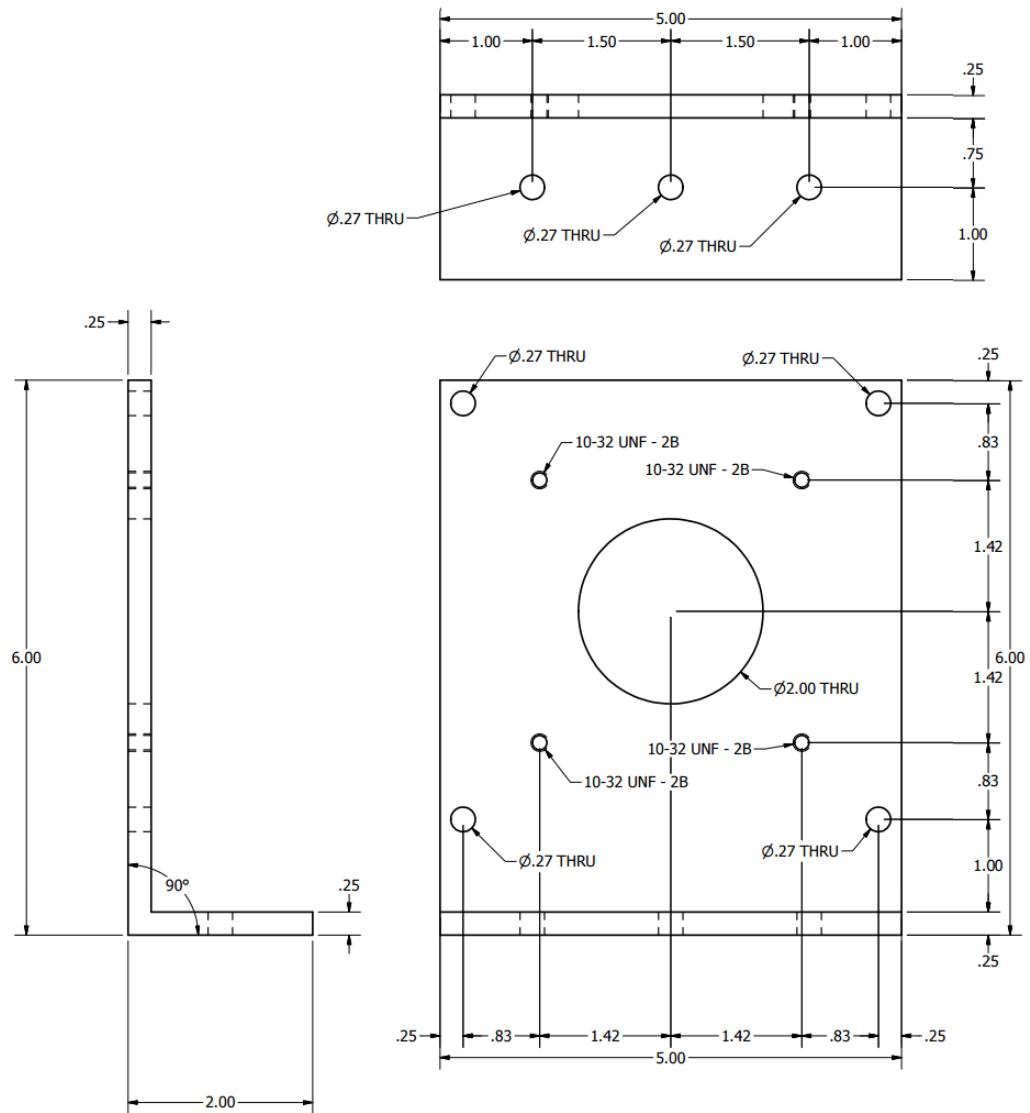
Extraction Plate Assembly - L Bracket
